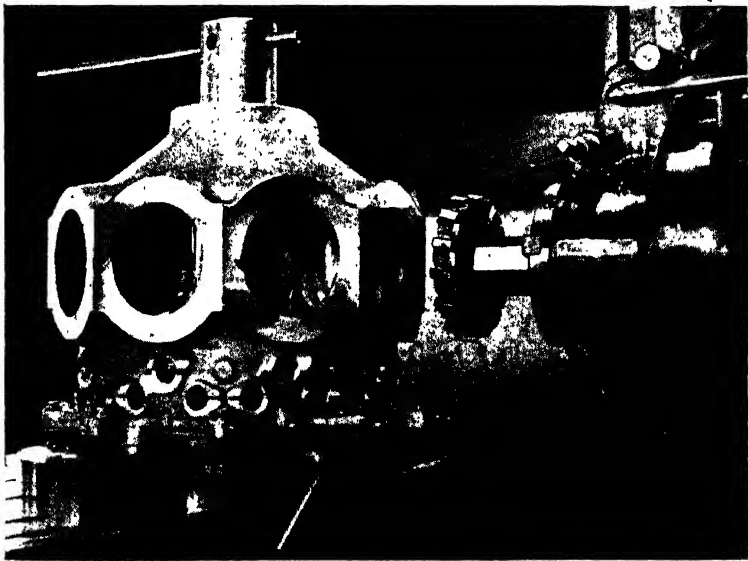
Milling an Airplane-engine Crankcase on Horizontal Boring Mill
